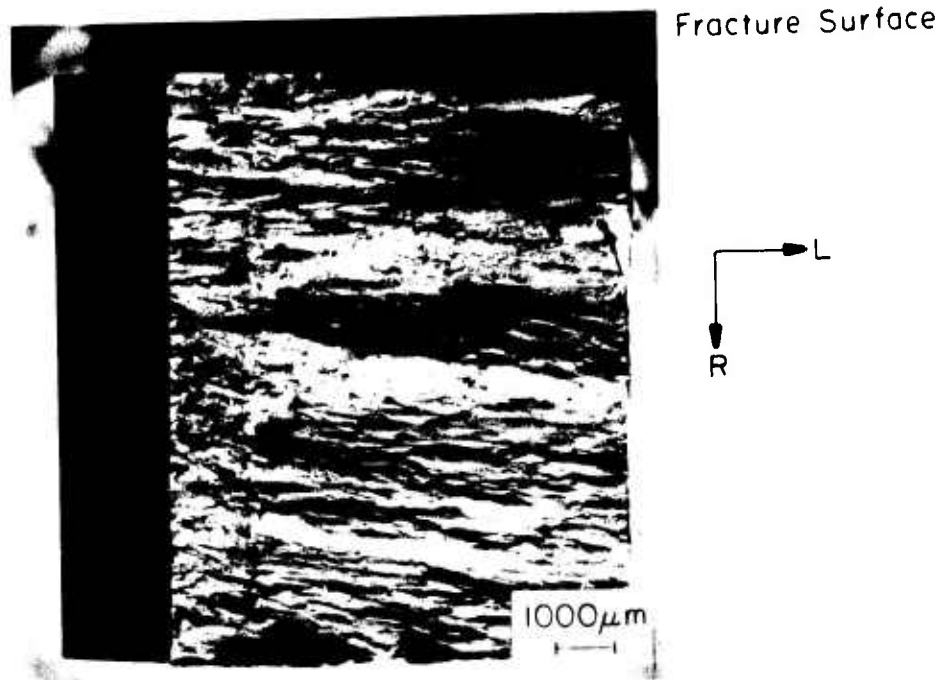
Alloy 227, sample 7SLE2. Fracture surface X8, surface replica X5200.
